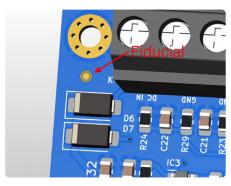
Fiducial at the PCB edge. Essential for pick-and-place alignment and optical inspection.
